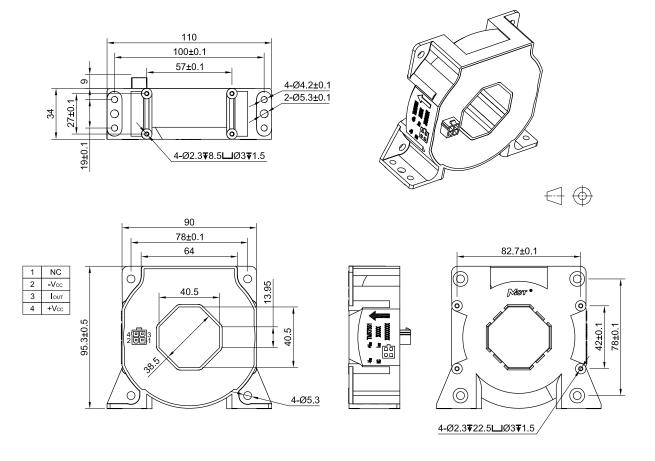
Dimension (unit: mm, tolerances for unmarked scales ±1 mm)
